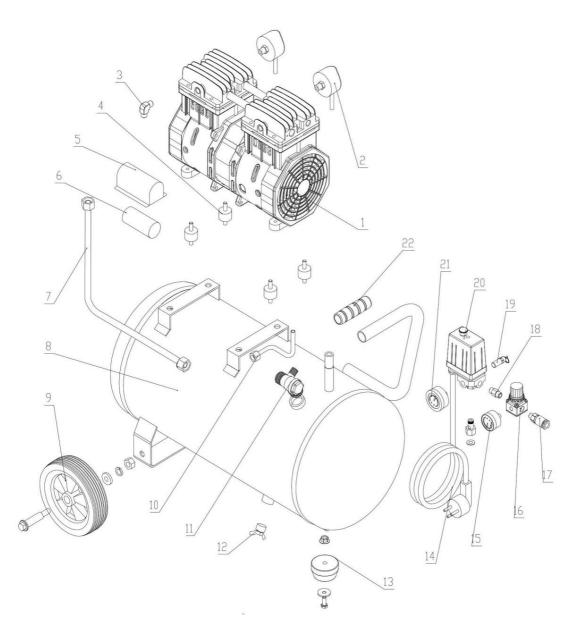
Spare parts Mobilboy Silence 211/24 OF E and Mobilboy Silence 241/24 OF E
